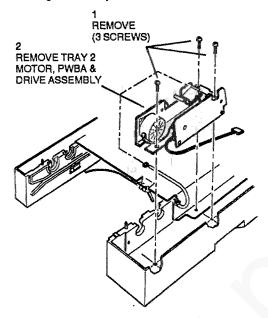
Tray 2 motor, PWBA & drive assembly removal
